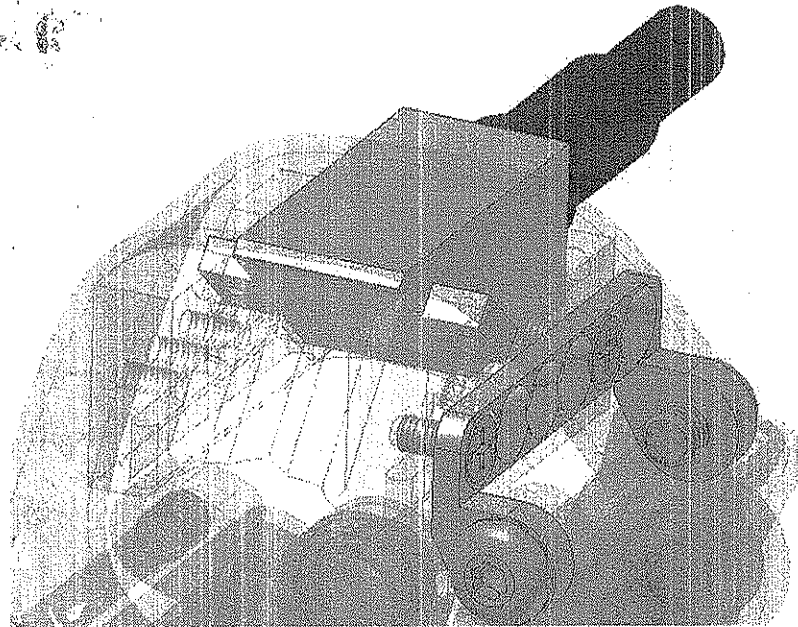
Wedge Attachment - 0.5" to 1.25" NPS
